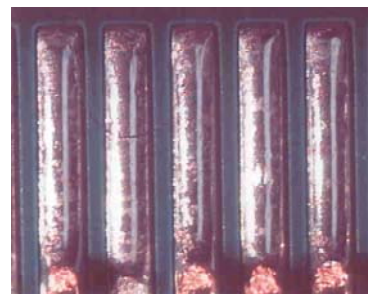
J1 Connector after low Pressure Saponified (EnviroGold 816) with Steam Rinsing (PDQ)
